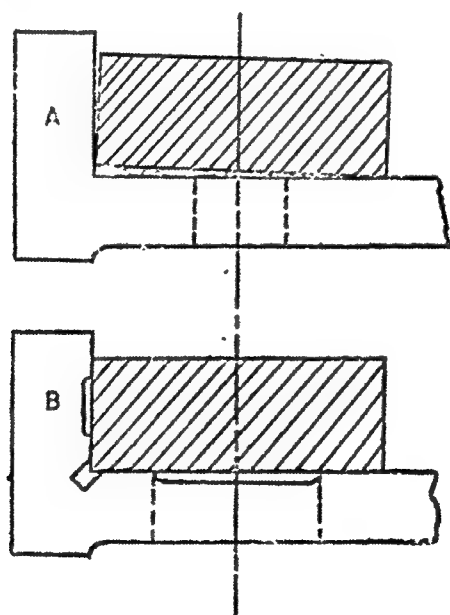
(a) Faulty location (b) Location improved with relieved machined surfaces
